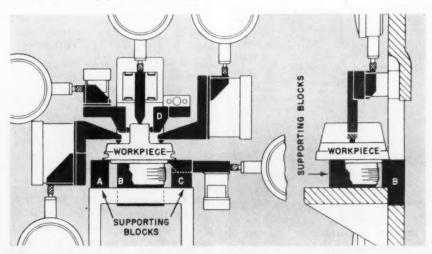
This sketch shows positioning devices incorporated in a multi-check type of gaging device.
